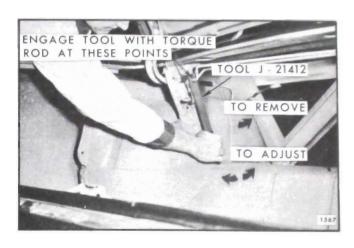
Rear Compartment Torque Rod Adjustments
